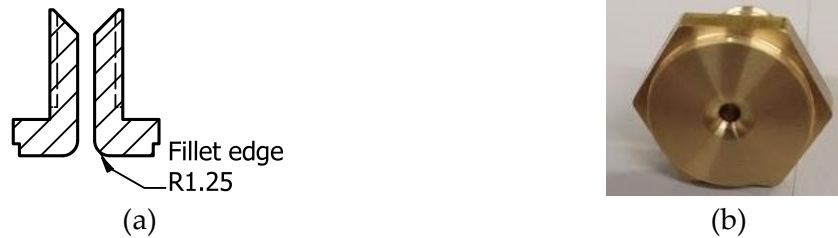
(a) Drawing of the designed nozzle with a 1.4 mm diameter and 1.25 mm fillet radius; (b) brass nozzle used in the printing process.
